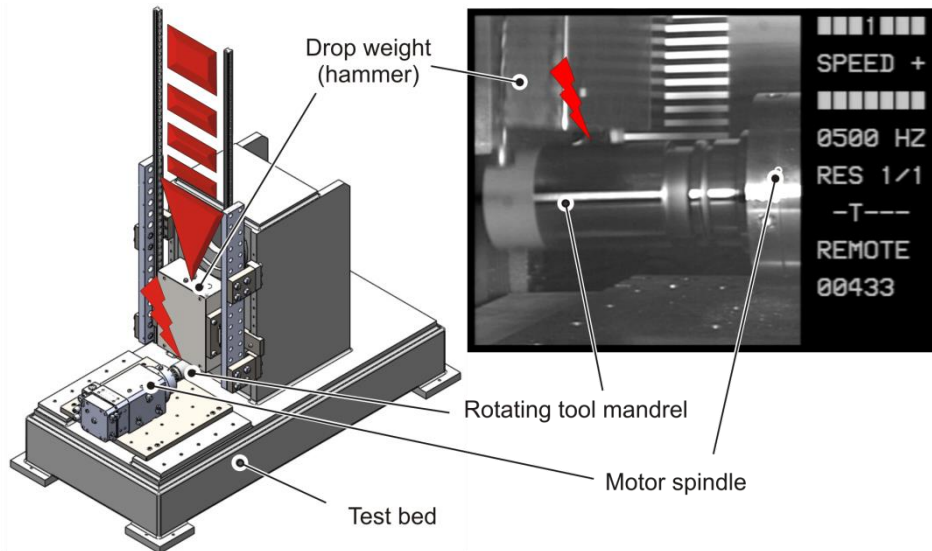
CAD model of the test stand for simulating a spindle crash and a photo of the test, taken with a high-speed camera during the contact
